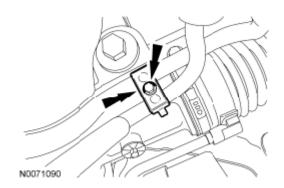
Locating Power Steering Tube Clip And Bolt Courtesy of FORD MOTOR CO.
